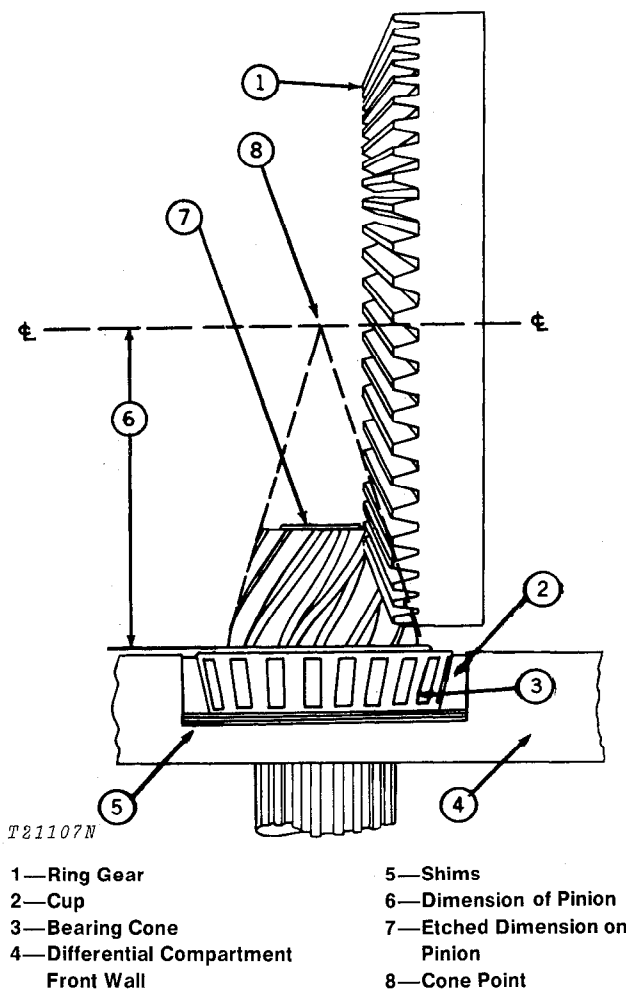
Ring Gear and Pinion Cone Point Adjustment
